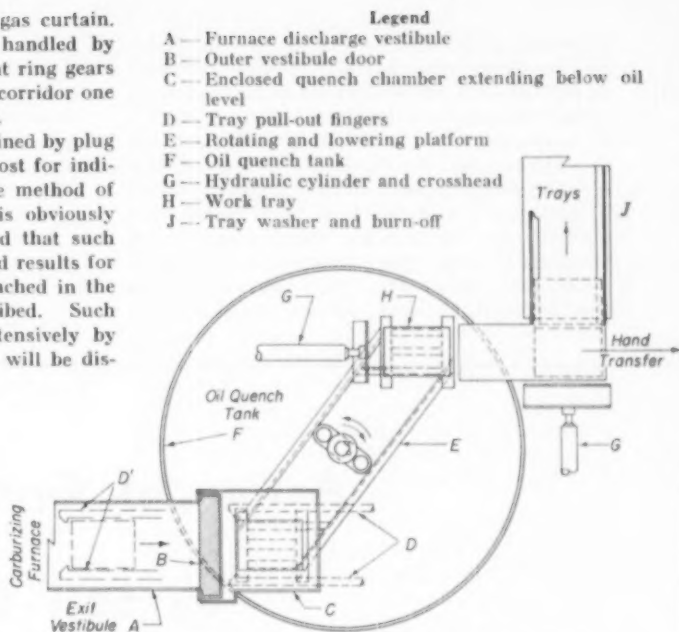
Automatic Quenching Mechanism Used With Continuous Gas Carburizing Furnace (Courtesy Surface Combustion Corp.)
